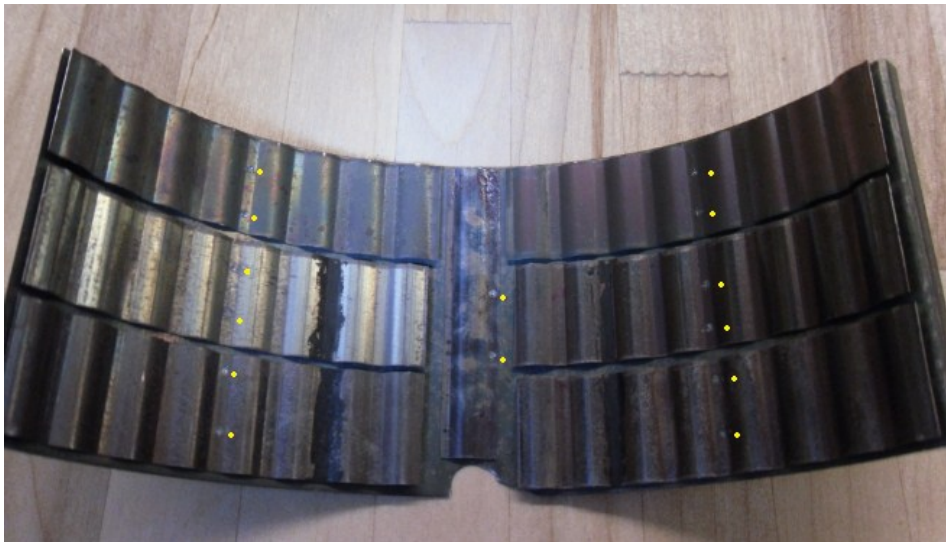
Spot Weld Location of Bump Foils.
